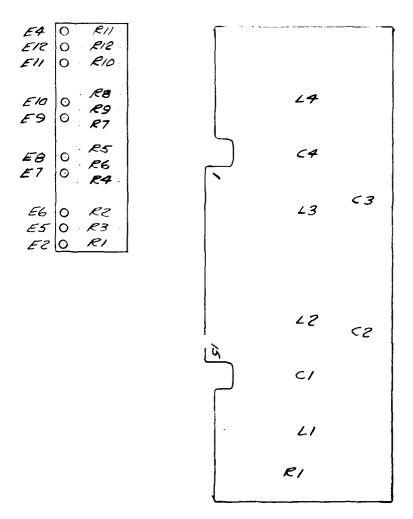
Attenuator & bandpass filter boards, parts location diagram.
